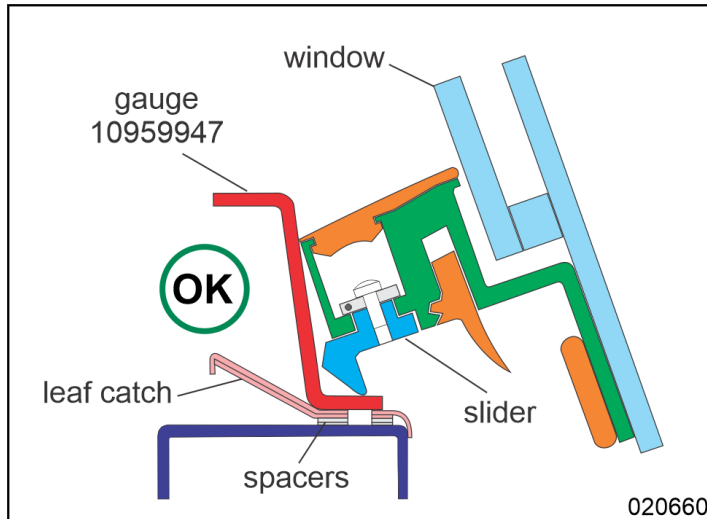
Checking installation height of leaf catch with red gauge (no rivets installed!)
